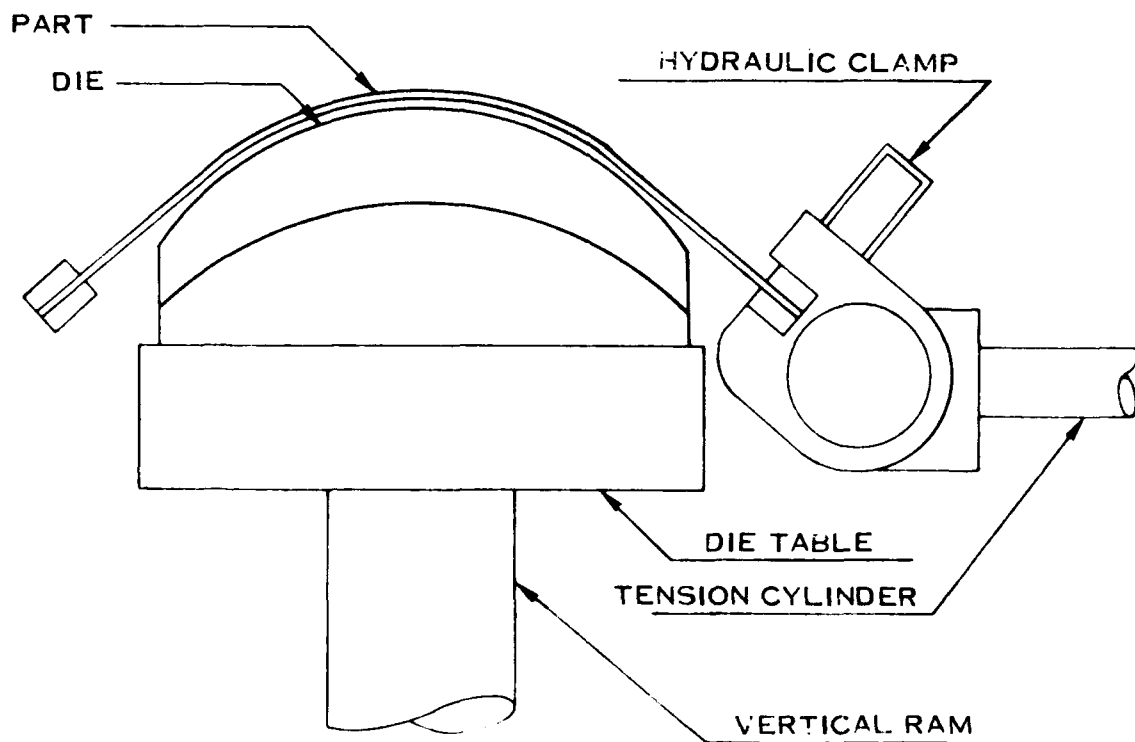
SCHEMATIC OF SHEET STRETCH SET-UP
